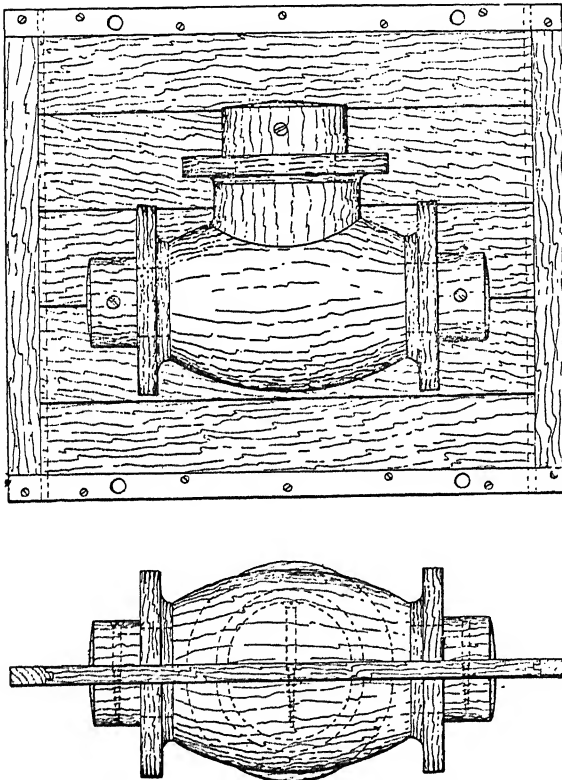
Wooden Cock Pattern mounted on a Joint Board
